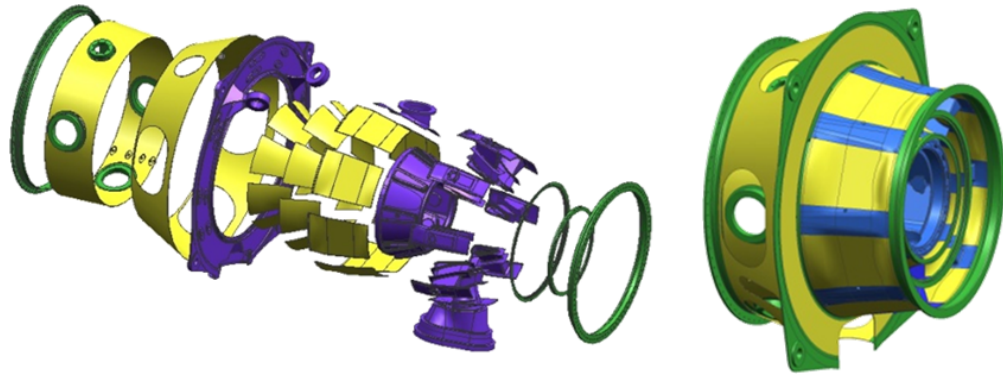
Fabrication concept: A number of smaller sub-components made of different material forms (left) are joined by welding into a final casing (right).
